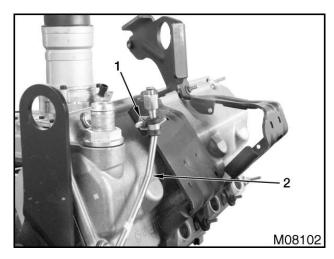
Exhaust Back Pressure (EBP) tube assembly
